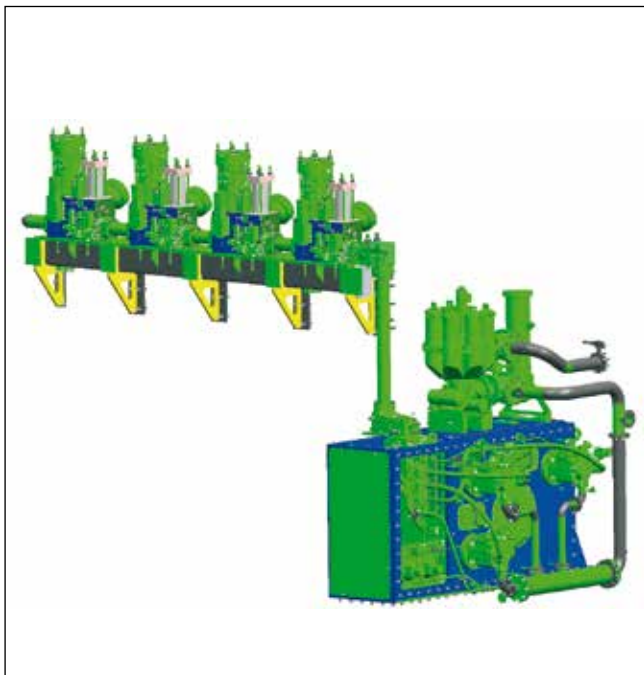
Previous design with safety and accumulator block and startup pumps in the gearbox and double-walled pipes
